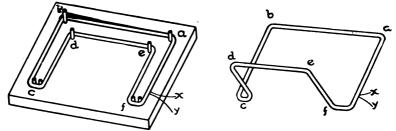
Eickemeyer Coil on Former and Opened Out.
